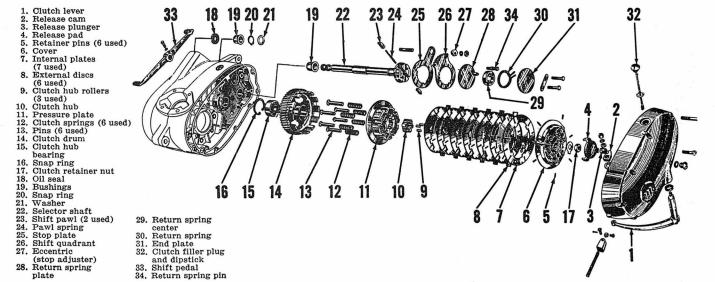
Exploded view of clutch assembly and gear selector mechanism. Gear quadrant (26) meshes with left end of shift drum (11-Fig. M 14).
